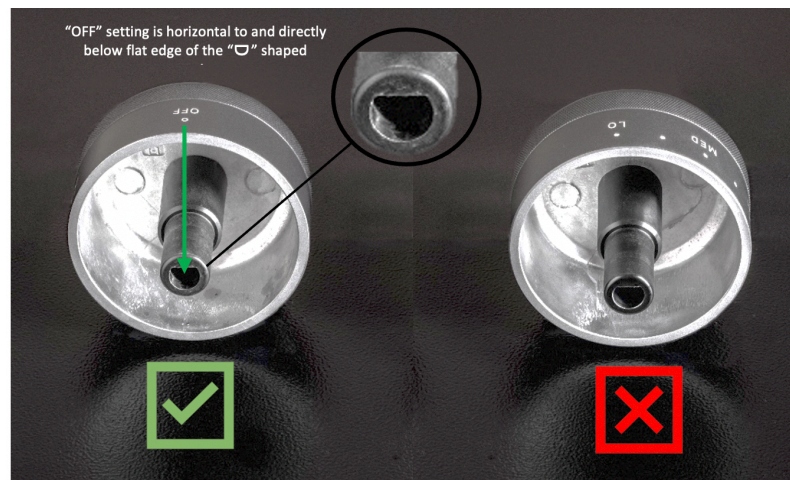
Example of knob with misaligned printing. Good knob (Left) and misprinted misaligned knob (Right).
